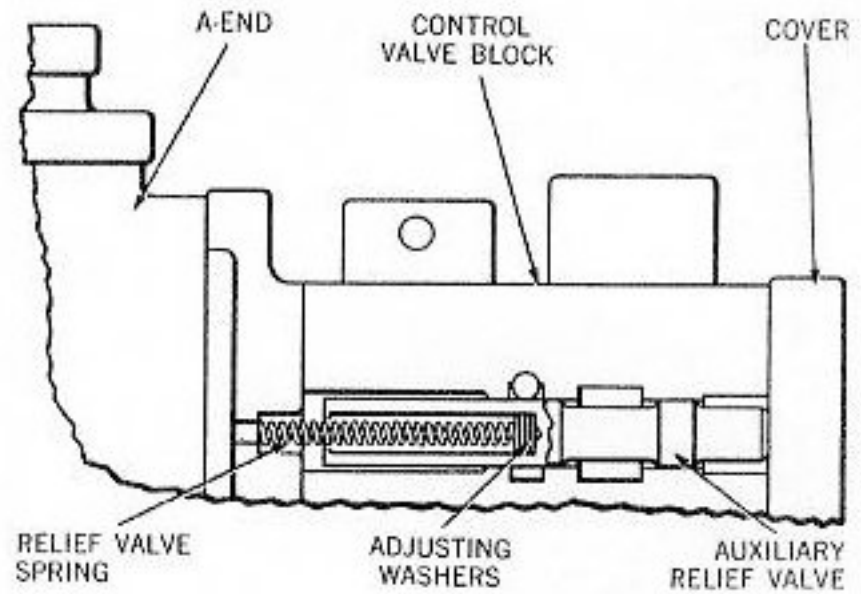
Projectile Ring Auxiliary Relief Valve Adjustment
